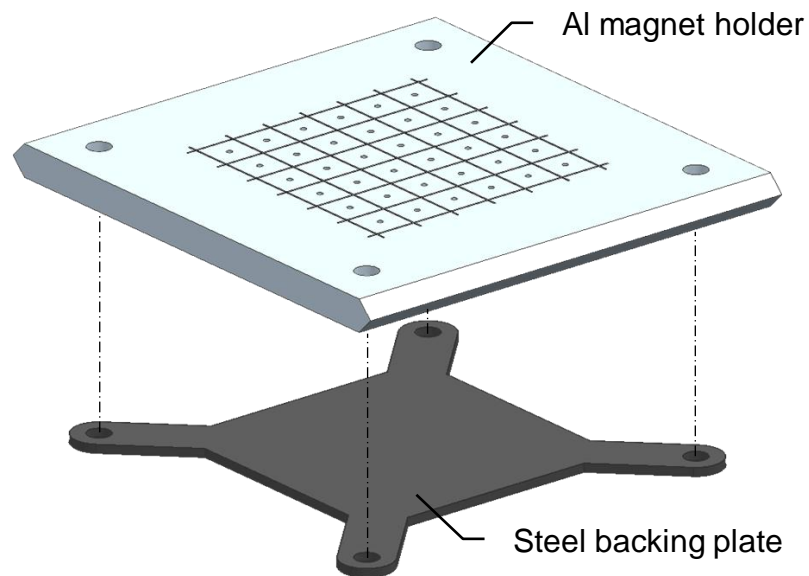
Illustration of permanent magnet holder used for batch assembly.
